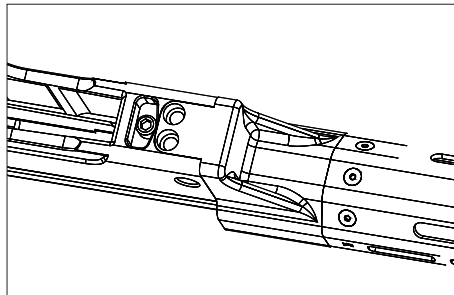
Center Chassis Section Hand Guard Screw Holes Aligned
